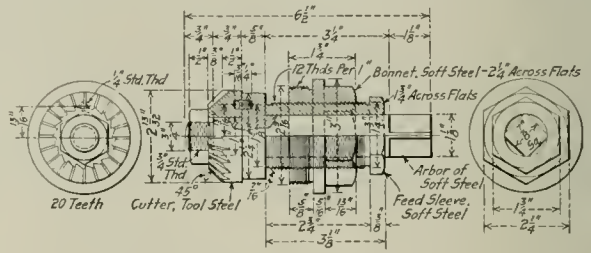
Reseating Tool for Ohio Boiler Checks
